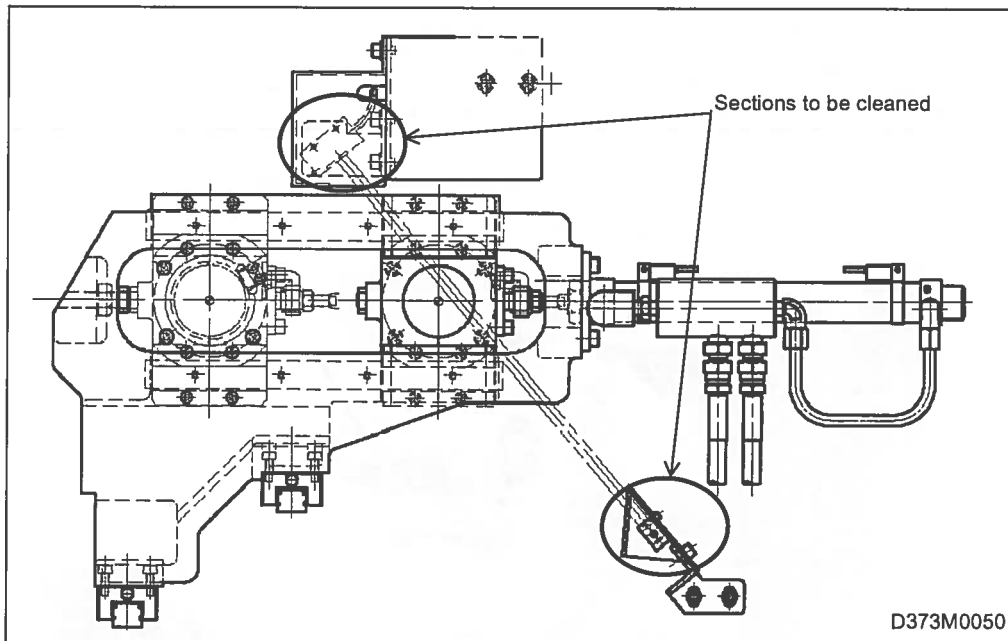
Tool detection sensor (20/40-tool magazine)
